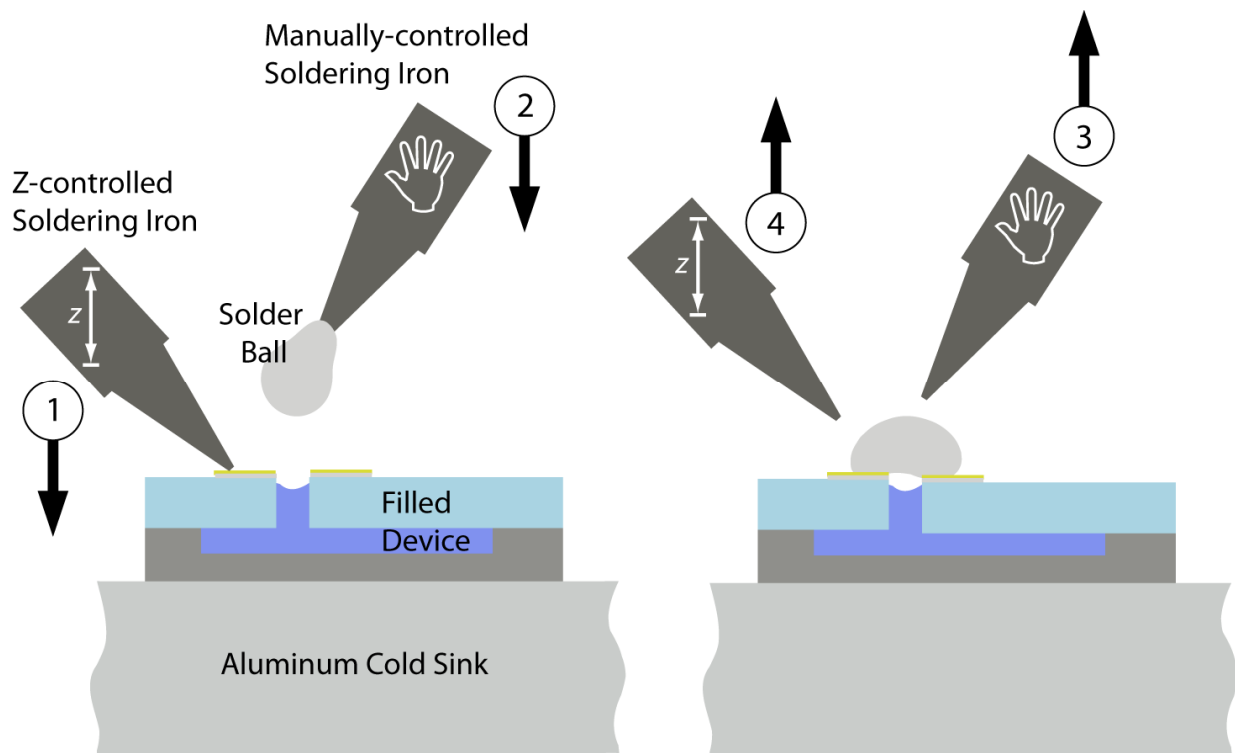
Top: General setup and procedure for solder-based sealing. First the gold bond ring was preheated using the z-axis controlled soldering iron (1). Then, the molten solder ball was brought into contact with the gold bond ring (2). Finally, each iron was removed in reverse sequence (3 then 4), leaving a hardened solder ball completely covering the hole.
